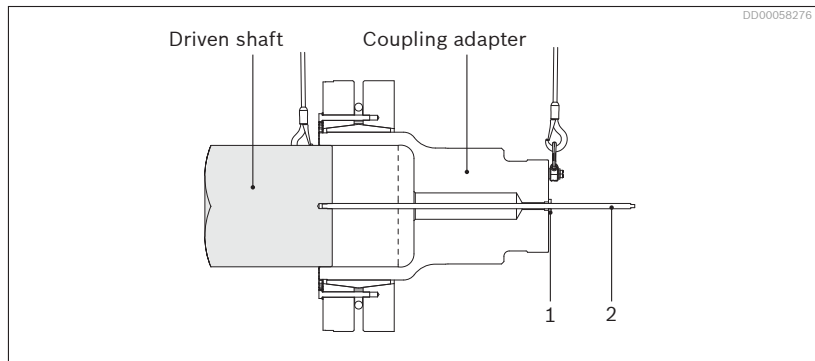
Mounting the coupling adapter on the driven shaft with the Assembly tool.
